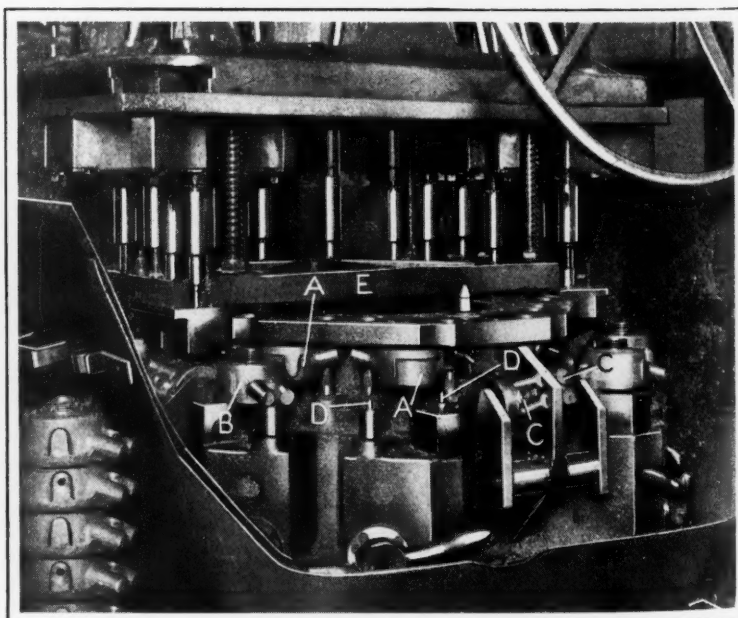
Multiple-spindle Drilling Machine Equipped with an Indexing Jig of Unusual Design
